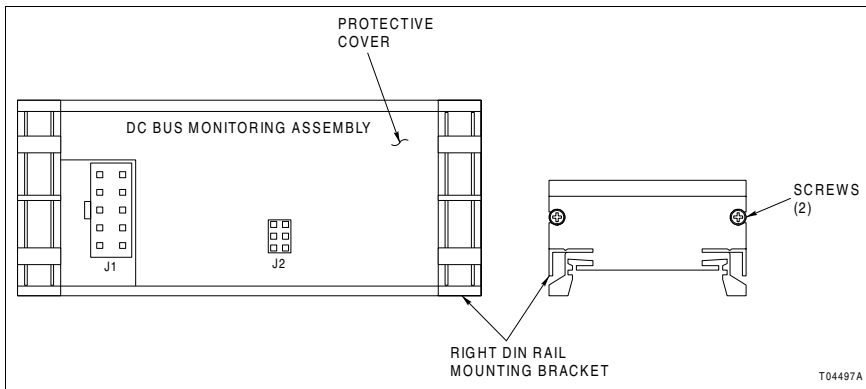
DC Bus Monitoring Assembly Jumper Access
